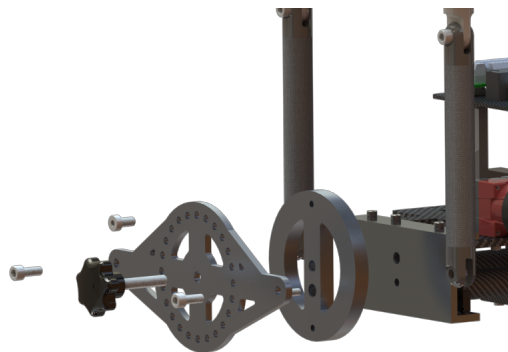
Aluminum mounting side brackets for maintaining the angling of the payload (exploded view)
